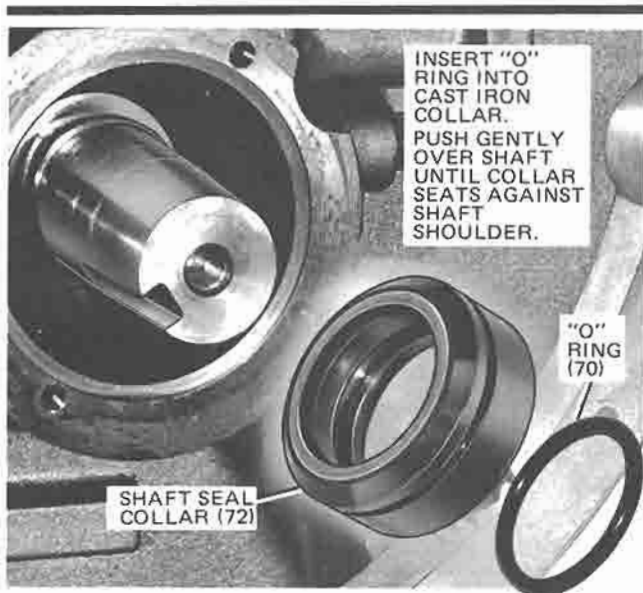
ASSEMBLING REAR SHAFT SEAL COLLAR
